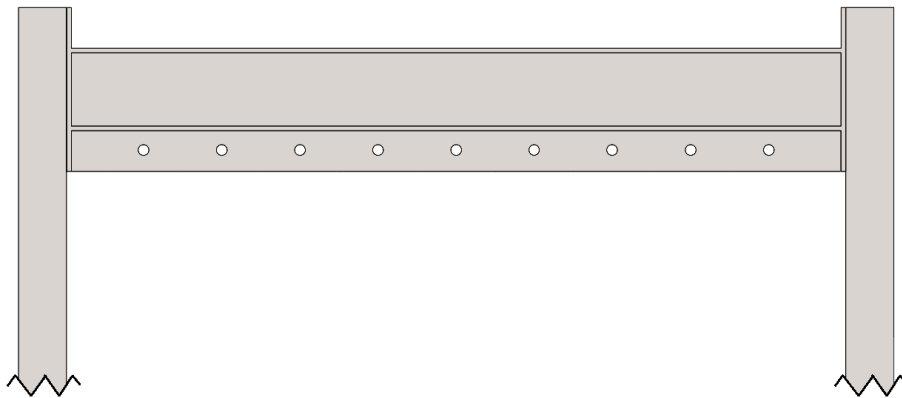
Detail of the perforated bar welded on the upper crossbar for mounting the resonant plate.
